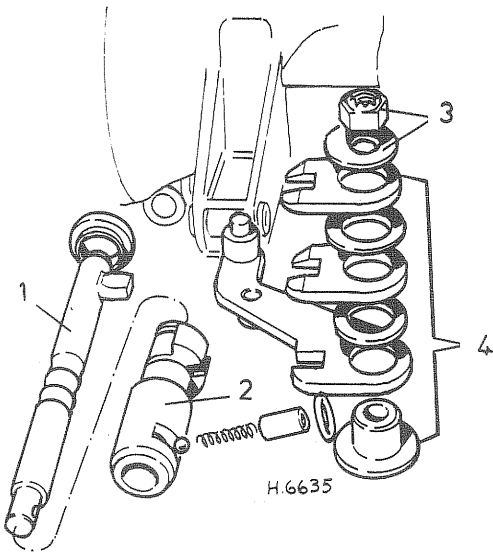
Rod-change type gear selector mechanism (Sec 9)
